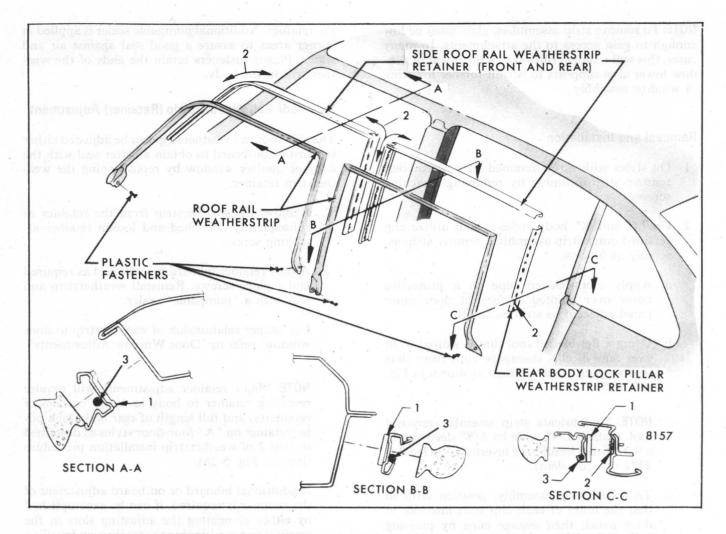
Side Roof Rail Weatherstrip and Weatherstrip Retainer - "A" Four-Door Styles Shown, Other Styles Similar
